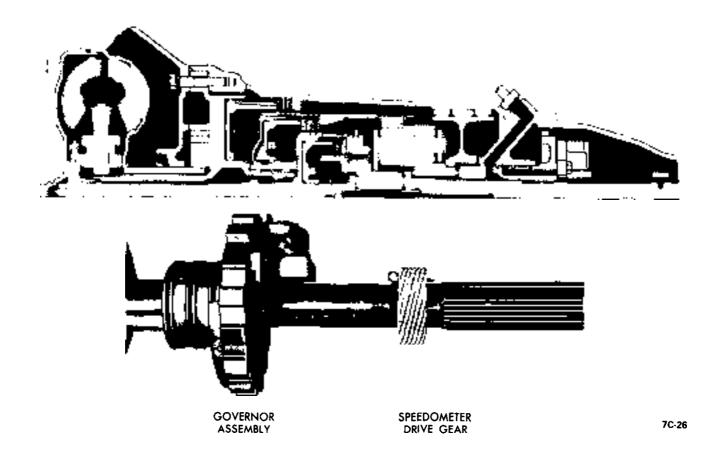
C-26 Governor Assembly And Speedometer Drive Gear
